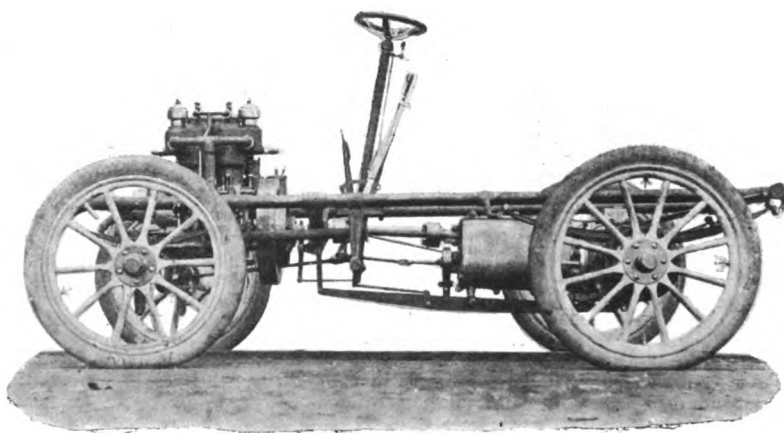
VIEW OF FRAME OF 8-H.P. DECAUVILLE CAR.
